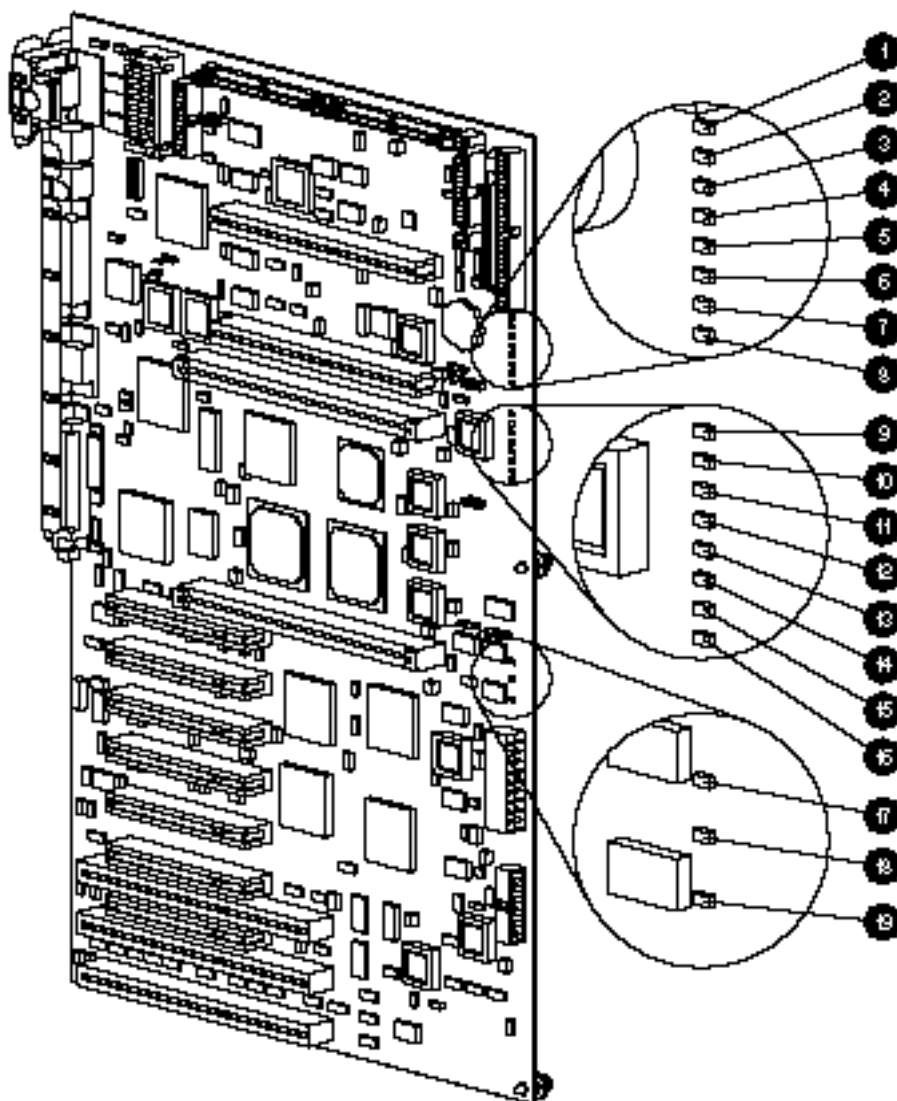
Locating I/O board LEDs listed in Table 5-3
